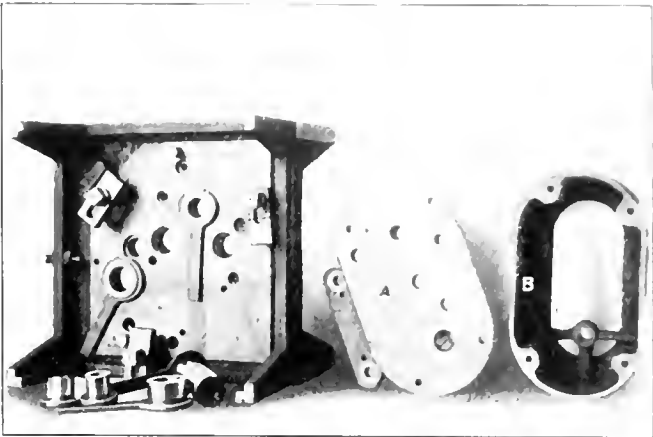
Drill Jig used for Drilling Work shown to the Right.
